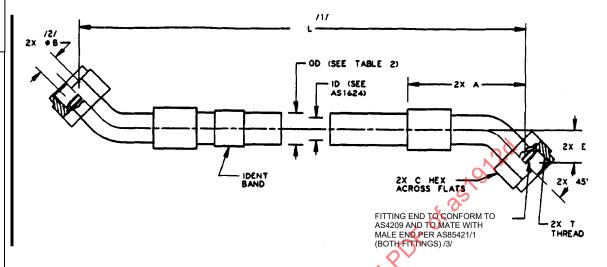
HOSE AND FITTING DIMENSIONS
